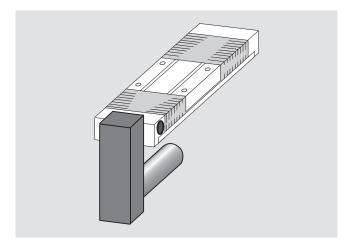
Screw drive with coupling and intermediate plate (Mounting condition 01 or 02)
